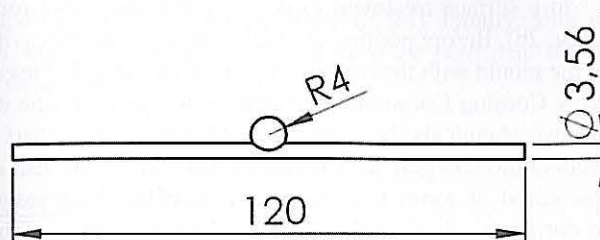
Geometry and dimensions (mm), of the aneurysm model
